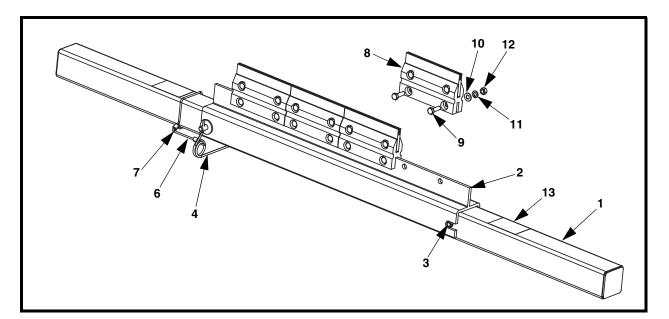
Martin[®] SQC2S[™] Cleaner Assembly with Mini Martin[®] SQC2S[™] Style Blades, P/N SQC2MS-XXXXXXXXXX
